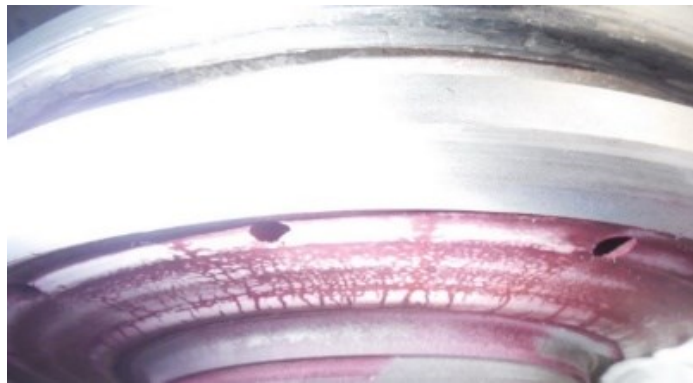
Cracks on the rotor disk surface examined by liquid penetrant test
